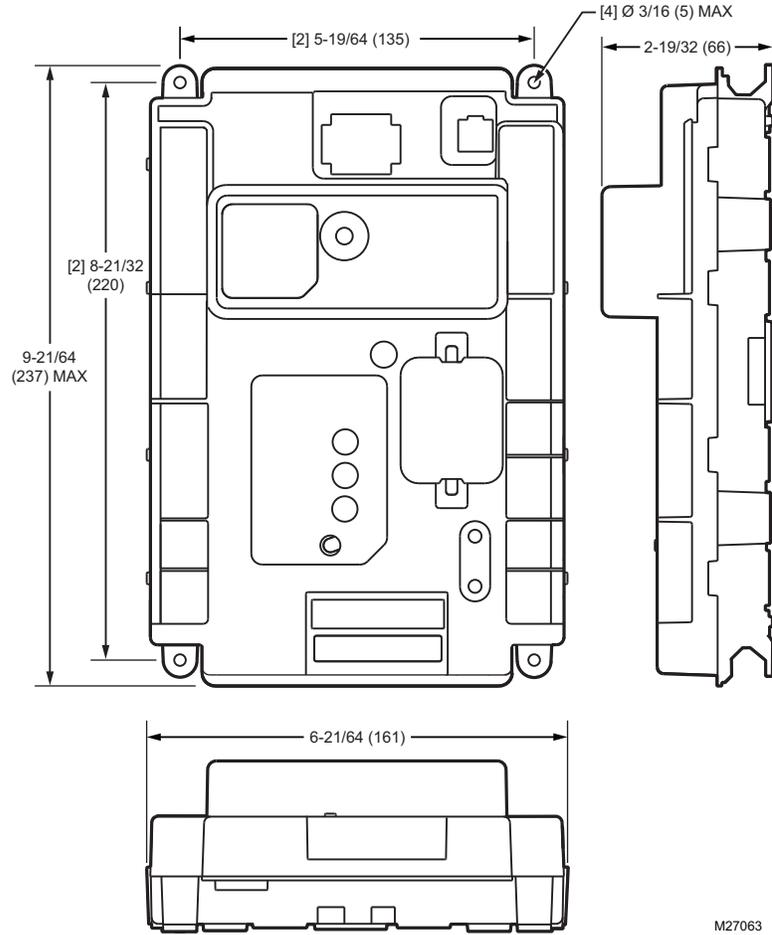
R7910A/R7911 dimensions in in. (mm).
